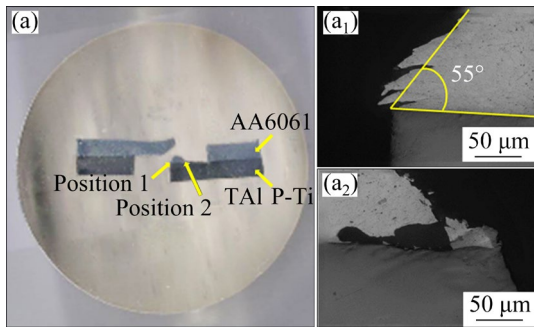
Interface shear fracture morphology of TA1 P-Ti/AA6061 composite plate after annealing: (a) Overall morphology of shear fracture; (a₁) Morphology of Position 1; (a₂) Morphology of Position 2
